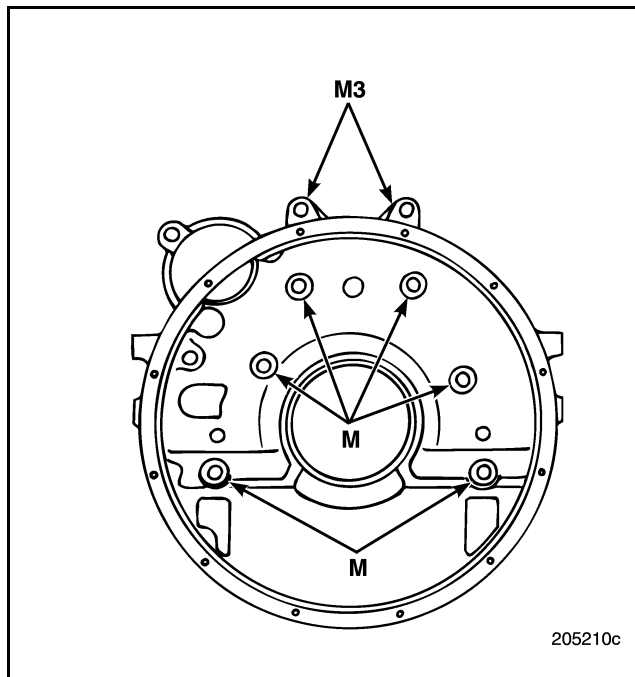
Aluminum Flywheel Housing with Four-Hole Side Pads (Non-Current Housing)
